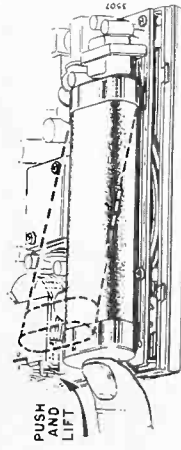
View Showing Method of Removing Later Type Battery Holder From Chassis Board.
